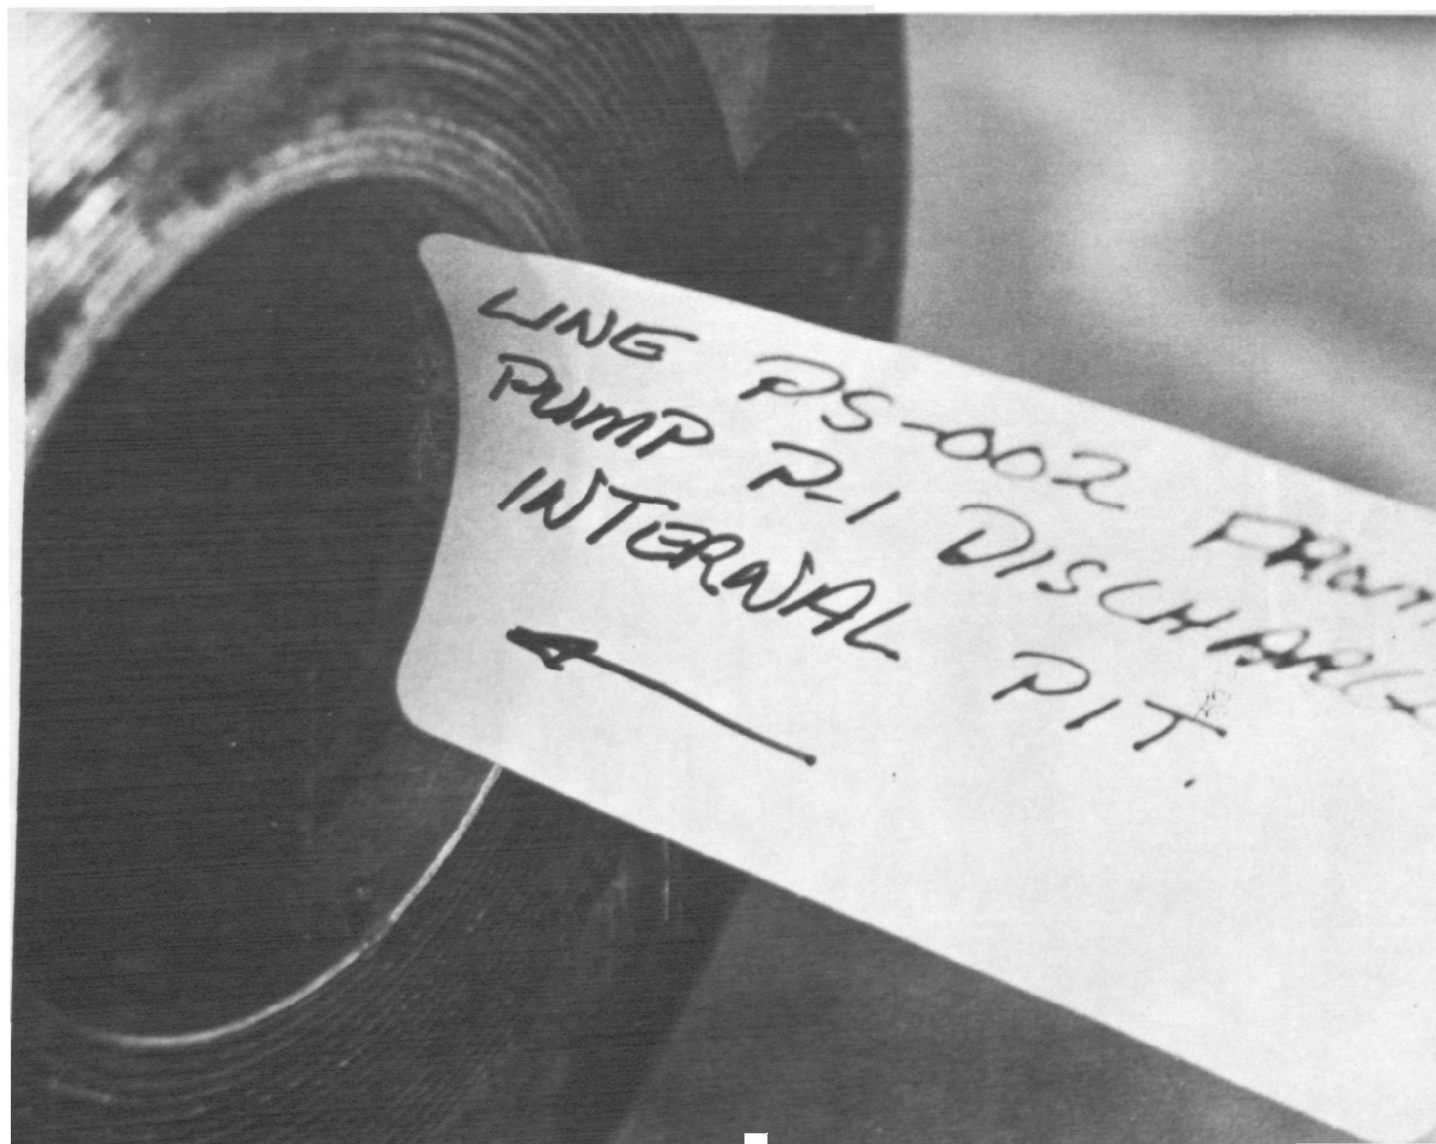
Pipe Flange Which Mates with Slurry Feed Pump P-1 Discharge Port.
